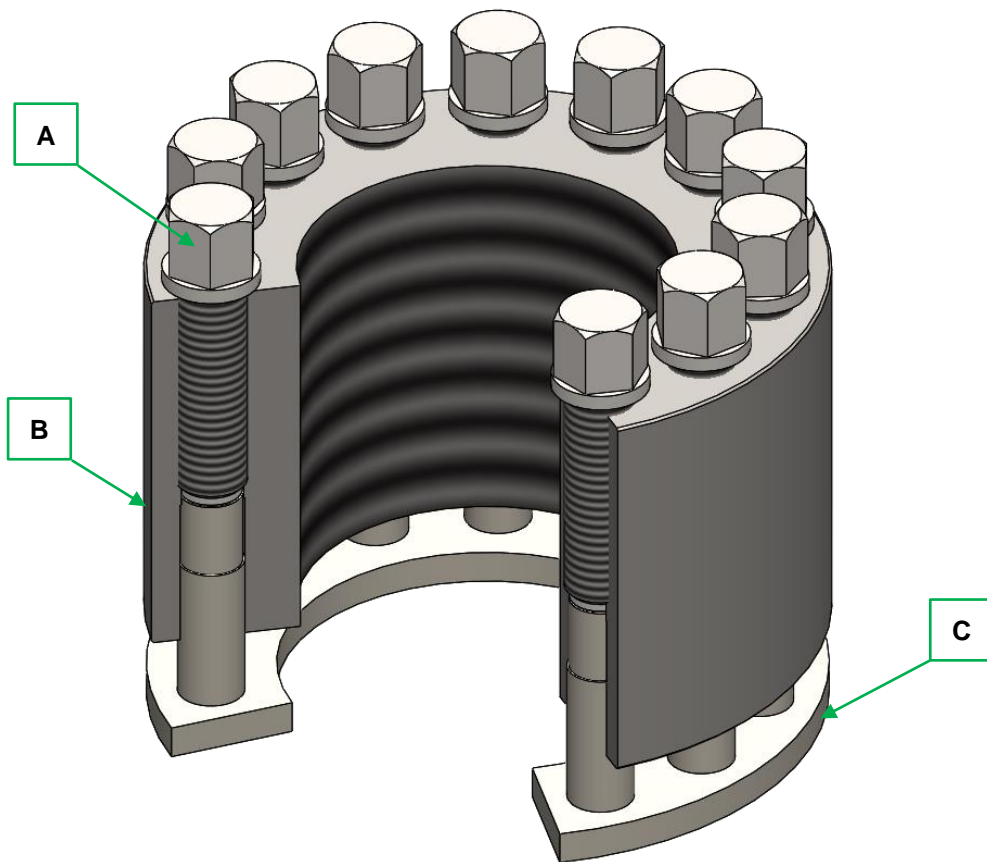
MECHANICAL JACKBOLT TENSIONER
